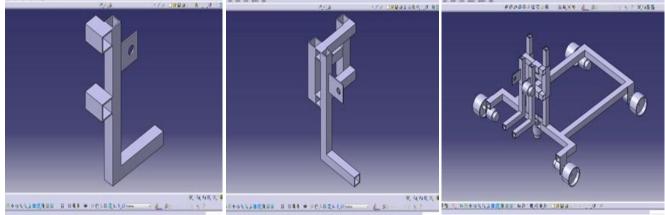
, (3.2.2) and (3.3.3) Design Assembly of Weed Ejector
